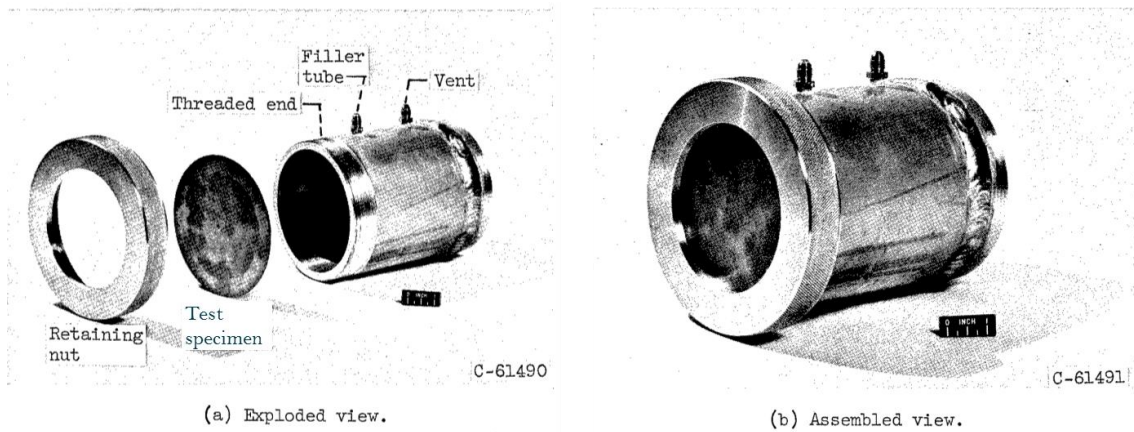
Pressure cylinder used in high-speed impact testing [3,4].
